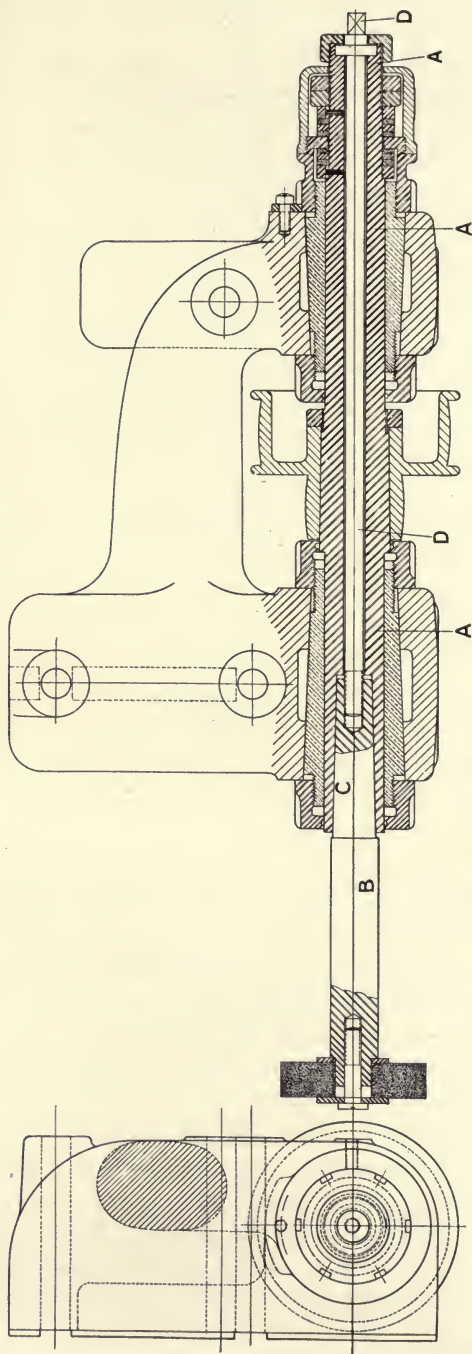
CHURCHILL INTERNAL GRINDING SPINDLE (ADAPTER TYPE)
